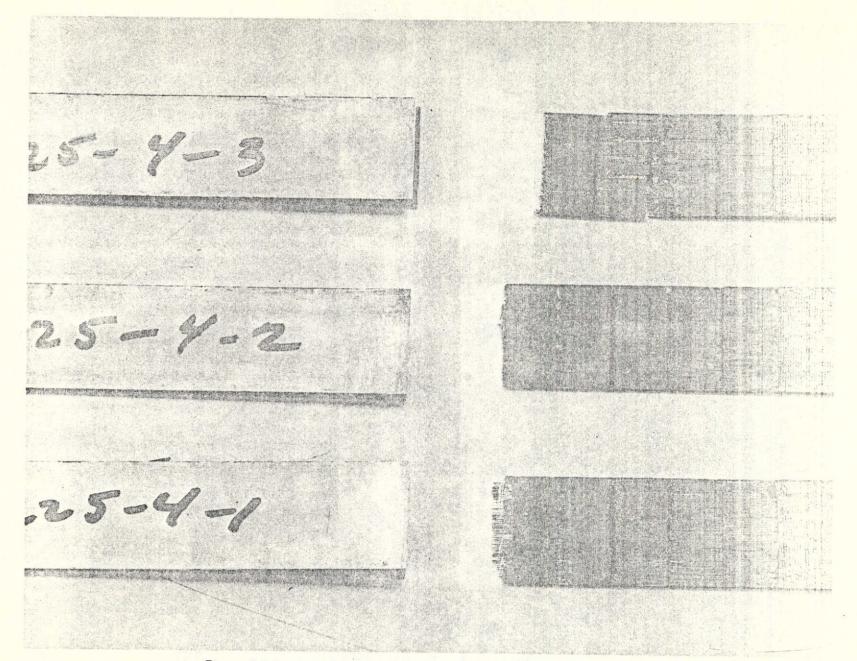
Load Transfer Speciments—Typical Failed Joint Areas
